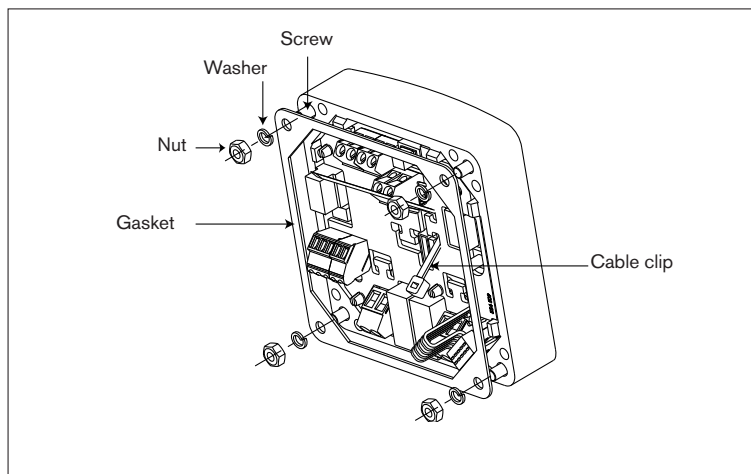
Installation pH transmitter 8205 panel-mounted version
